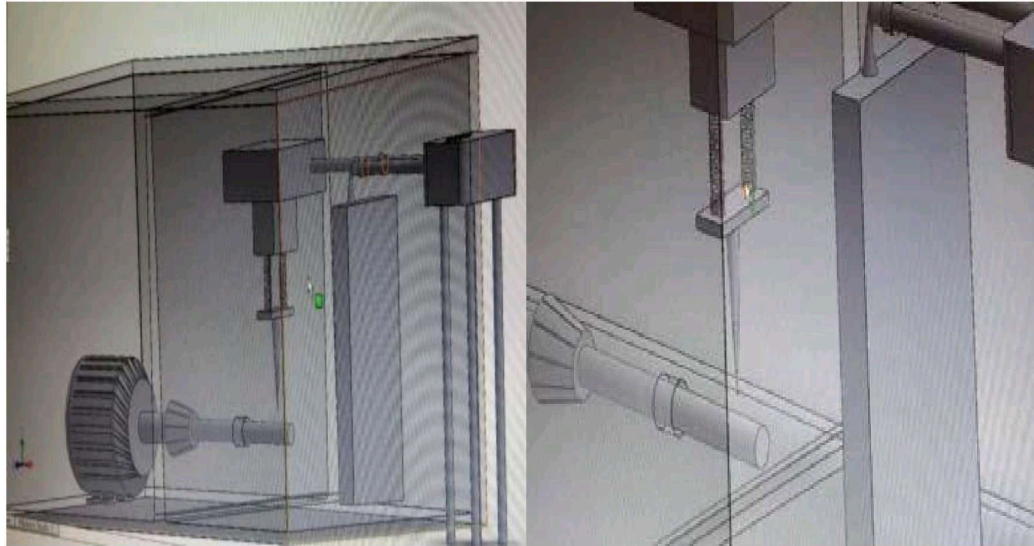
Isometric view of Tool And Workpiece holding devices
